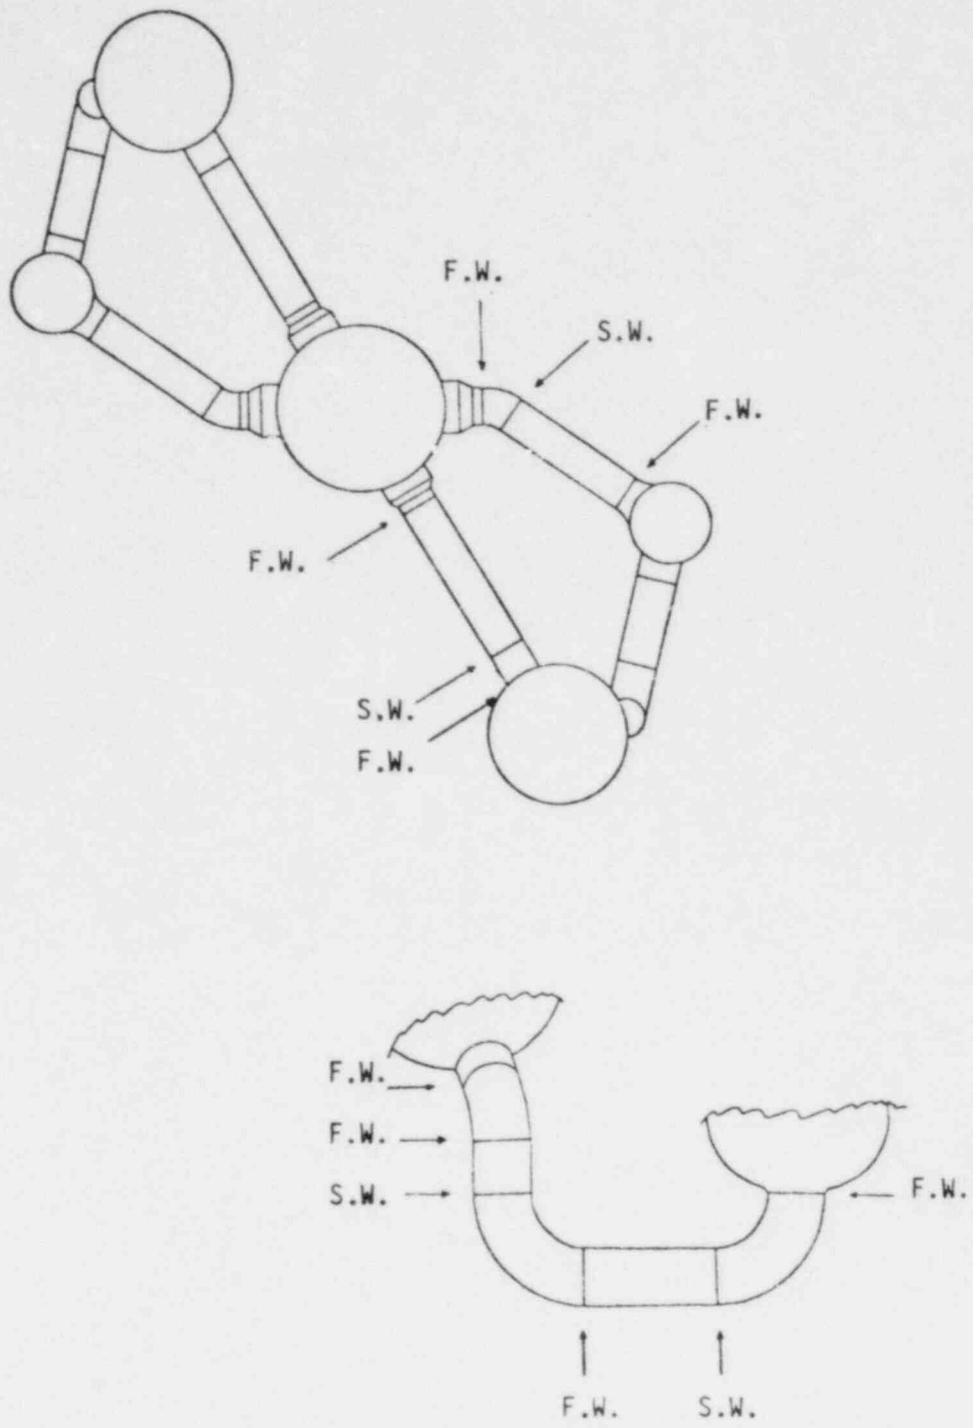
Weld location for R.E. Ginna Unit
